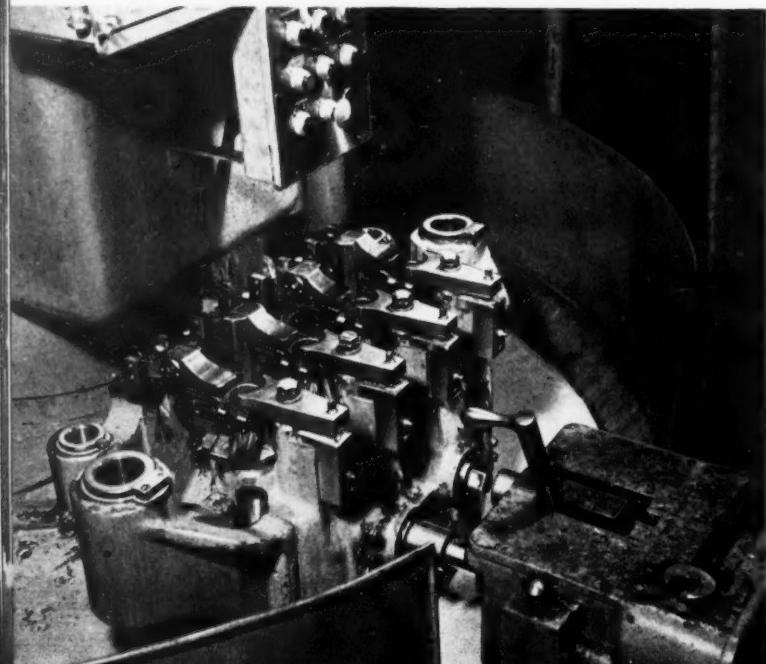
One of Two Machines Recently Installed for Drilling, Reaming, Milling, and Sawing Connecting-rod Forgings
